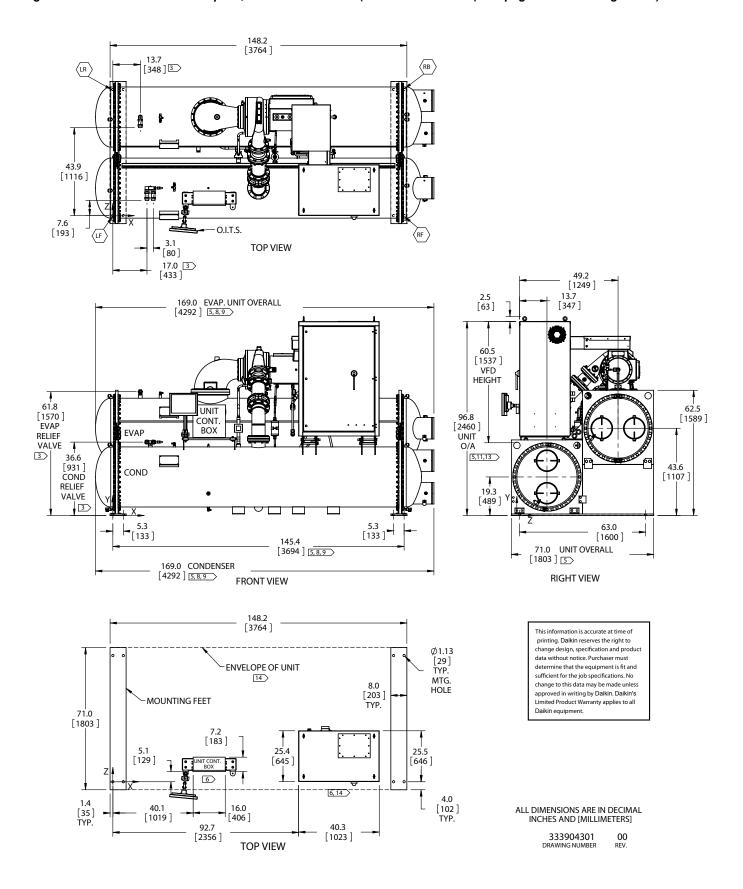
WME500 E3012/C3012, M2 Motor (50 Hz, 380-415V / 60Hz, 380-575V) WME500 E3012/C3012, M3 Motor (50 Hz, 400-415 / (60 Hz, 380-575V) WME500 E3012/C3012, M2 Motor with Internal Harmonic Filter (60 Hz, 380-460V)
